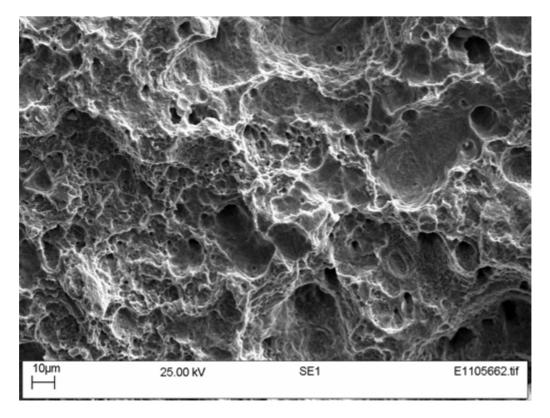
SEM fractograph, showing detail of figure 30 and fractography consistent with ductile microvoid coalescence type terminal fracture.
